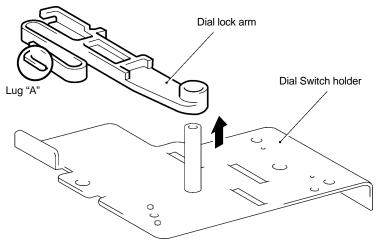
Disassembling the Dial Switch Holder Assy B (4)
